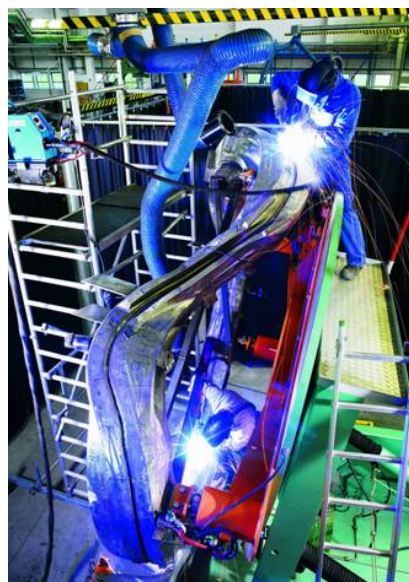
Welding of a coil casing for a Wendelstein 7-X non-planar coil
